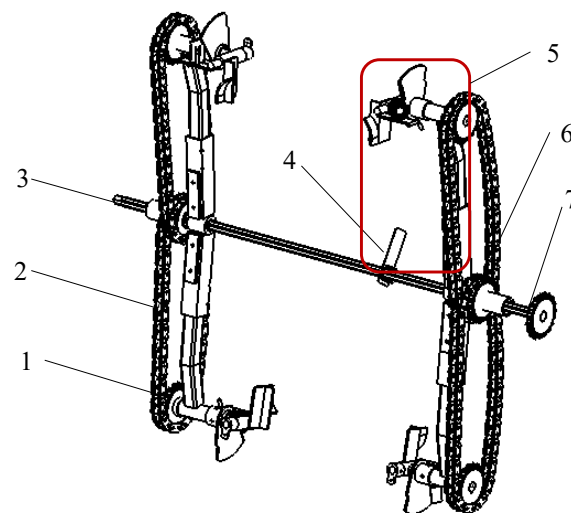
Schematic of the structure of the rotary double-insertion device. (1) Planetary sprockets; (2) sprockets; (3) axis of rotation; (4) inductor plate; (5) planting arm; (6) sun sprocket; and (7) rear drive sprocket.
